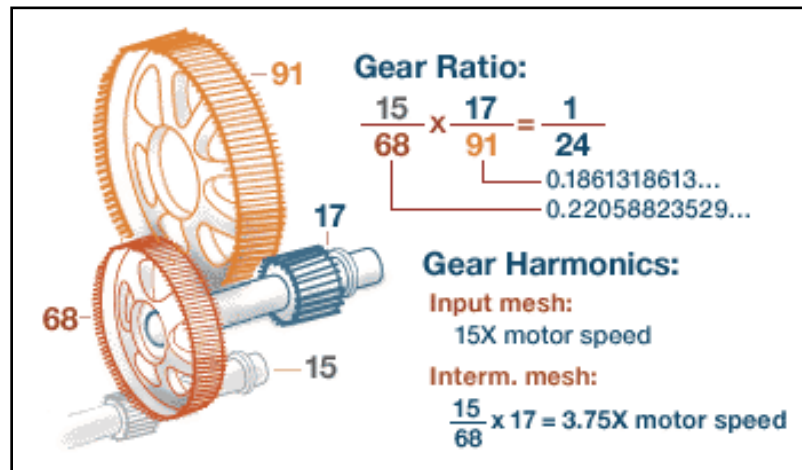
Sketch of gear system assembly inside Segway-PT's gearbox^[19]
